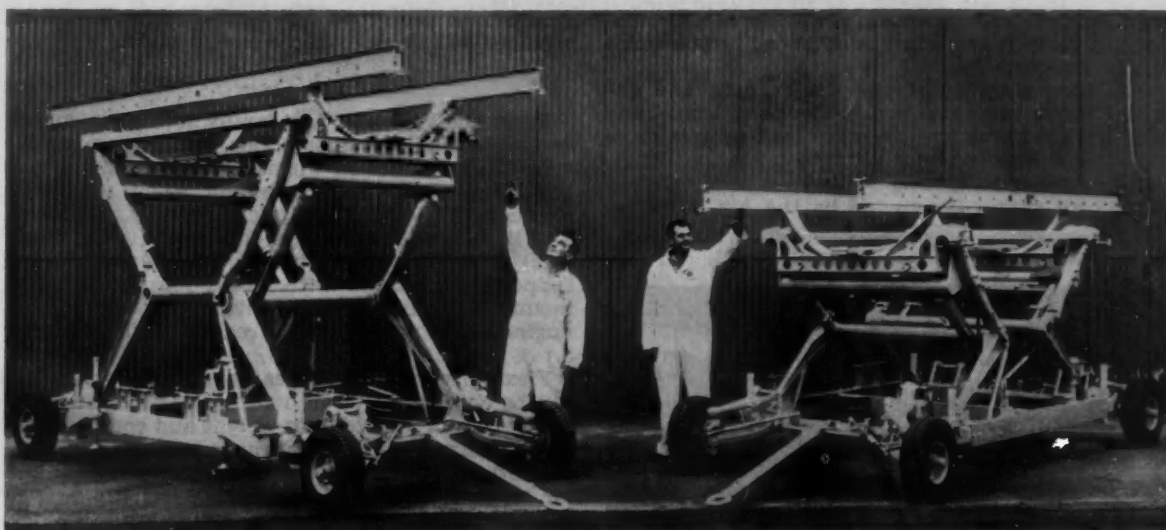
The Model 4100 (left) and the Model 4000 A (right) Positioning Trailers replace 151 former single-purpose engine removal units.
